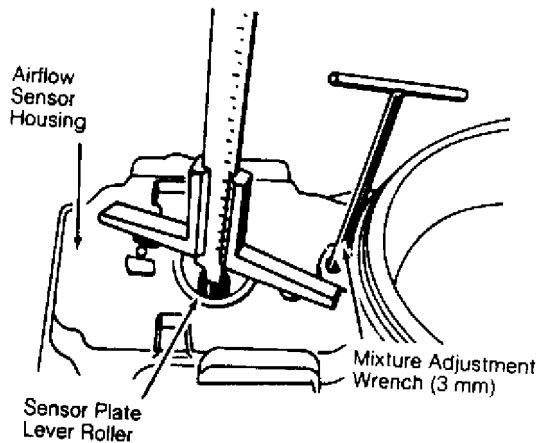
Adjusting Sensor Plate Lever (Passat GL)
